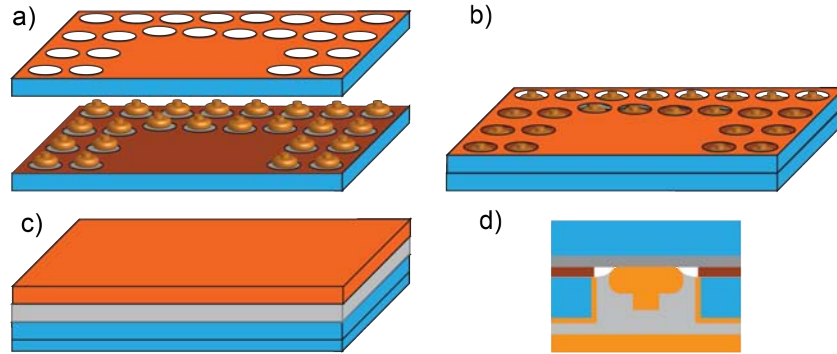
Usage of template 2: position template above chip such that Cu side faces upwards (a and b); add solder paste layer and copper plate (c); cross section of soldered chip (d).
